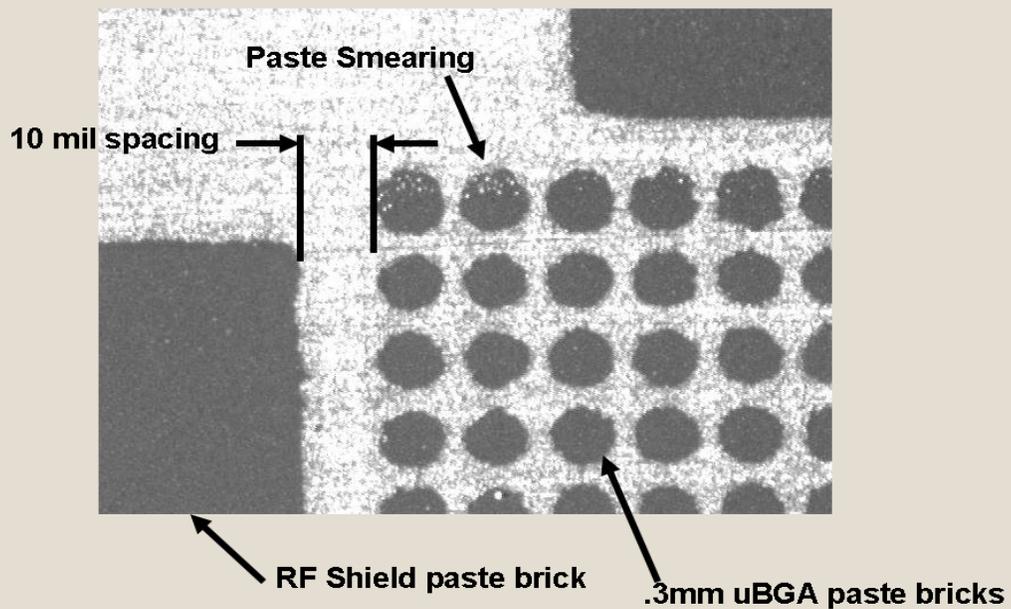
Solder Paste Bricks after 1st and 2nd Print showing paste smearing
